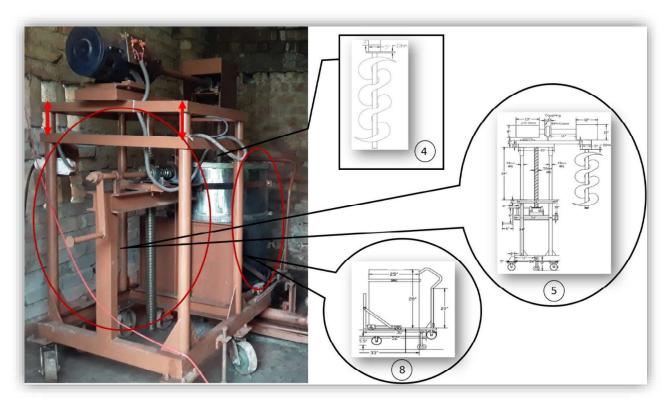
A detailed view of the designed drying unit, highlighting the position of inserted mixing spindle (4) in the vessel (8) after loading and the magnified view of main supporting body arrangement of the equipment.
